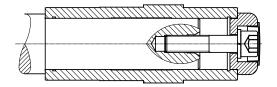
Gear unit mounted to shaft with a shoulder using the fastening element
